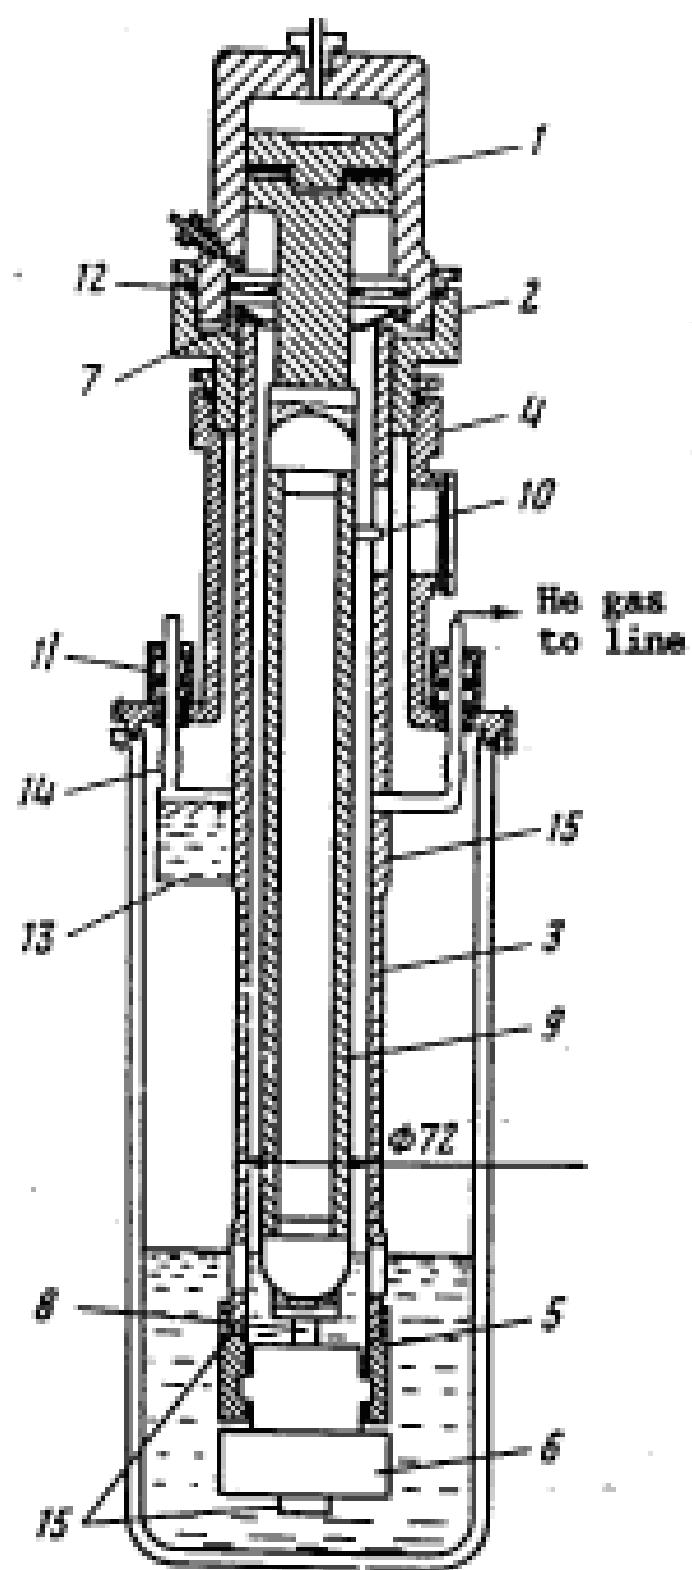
Press with cryostat: 1) cylinder; 2) coupling; 3) outer tube; 4) part joining press to cryostat; 5) lock; 6) high-pressure chamber; 7) disk spring; 8) shaft of high-pressure chamber; 9) inner tube of press; 10) mark; 11) sleeves; 12) vacuum-rubber gas-kets; 13) vessel for liquid nitrogen; 14) bellows; 15) attachment points for thermo-couple junctions.
